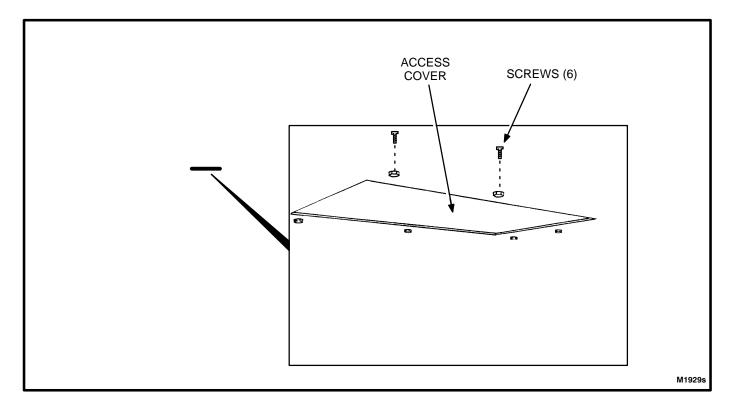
LOAD CABLE/DAY TANK FUEL LINE ACCESS COVER
